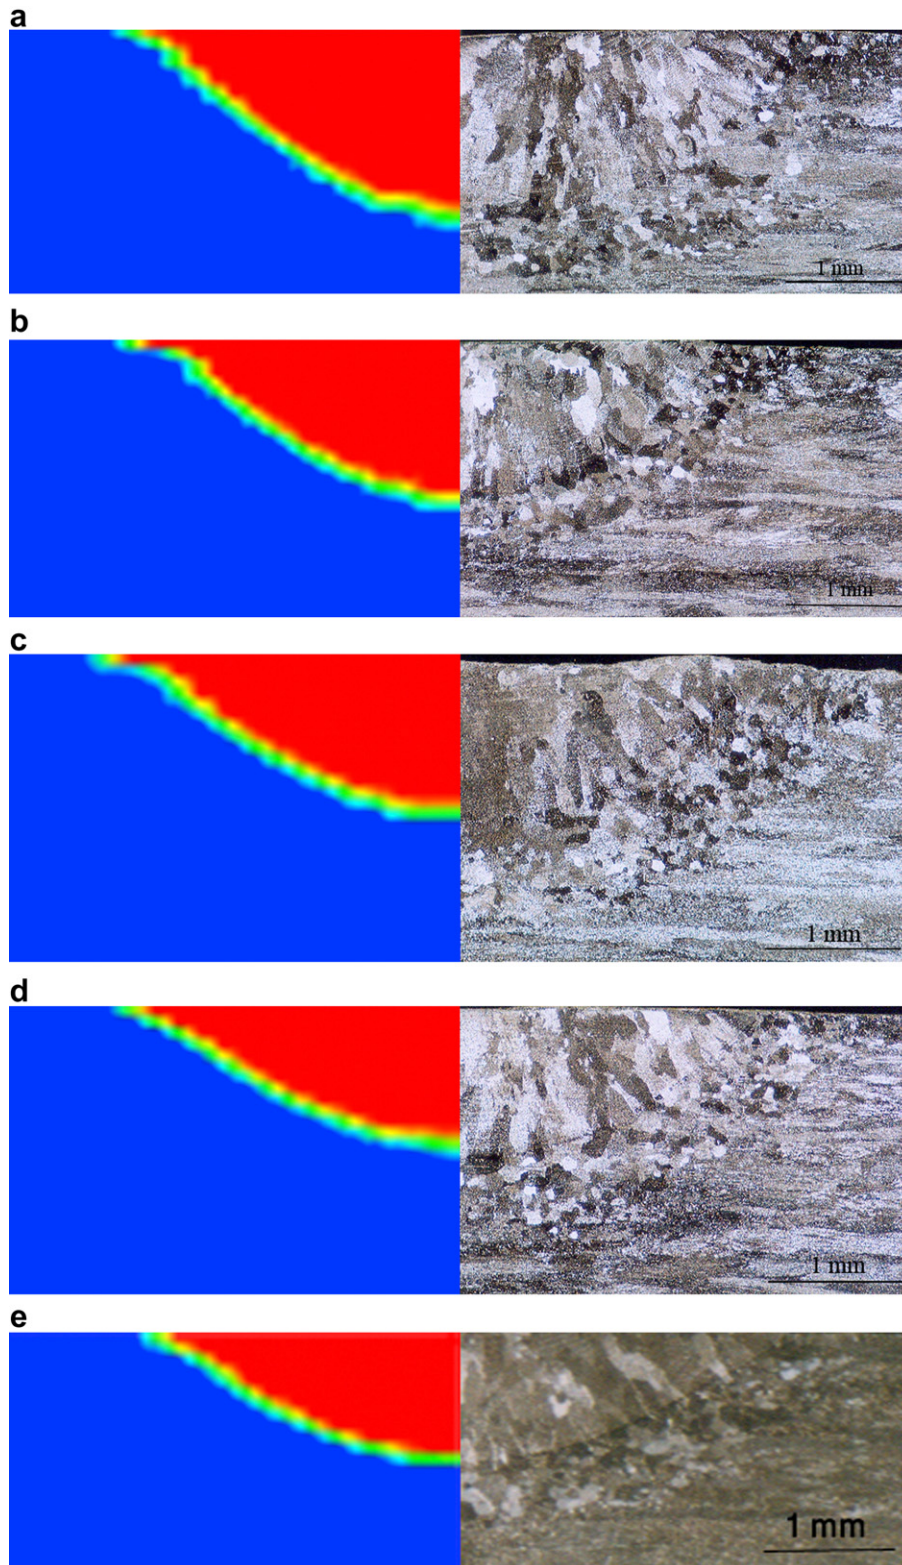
Experimental and calculated weld pool cross-sections for GTA welds obtained by using conditions of samples (a) WB1; (b) WB2; (c) WB3; (d) WB4; and (f) WB5.
